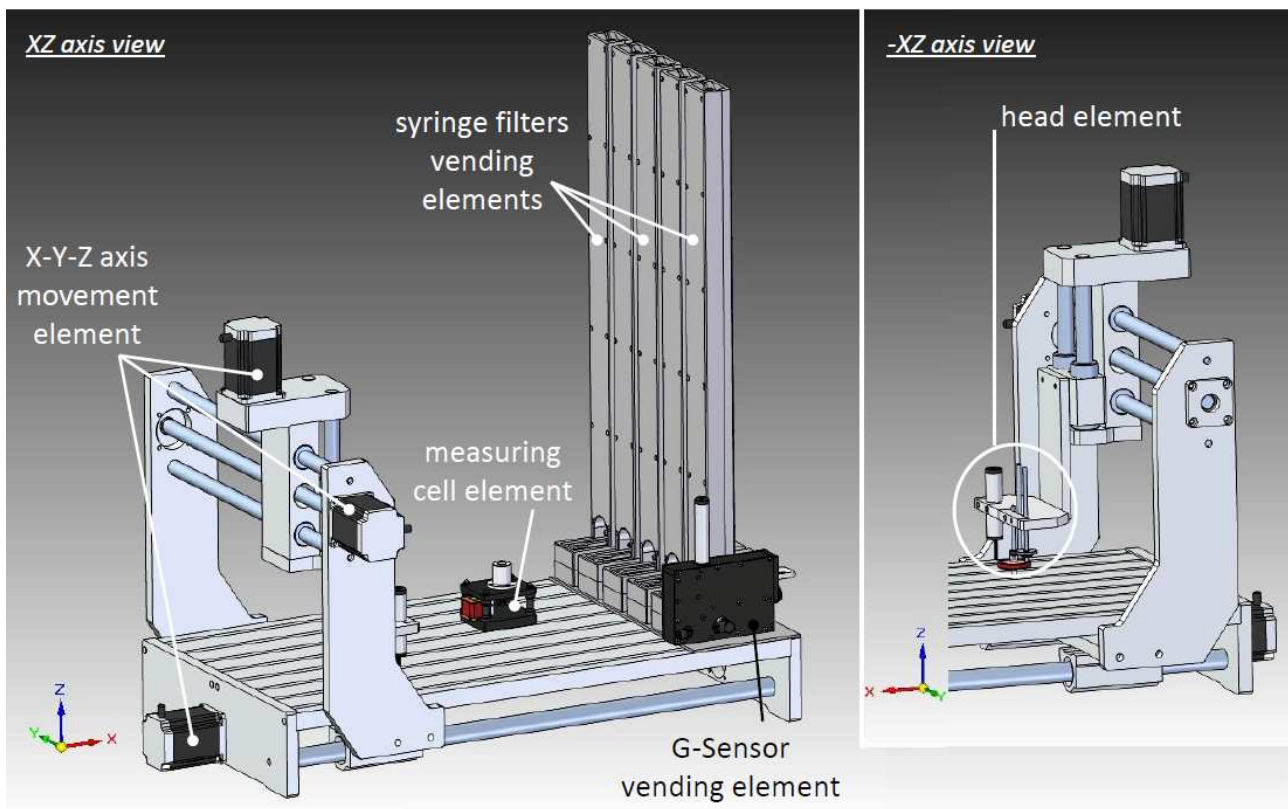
Safegrape In-Line prototype CAD design, XZ axis and -XZ view
